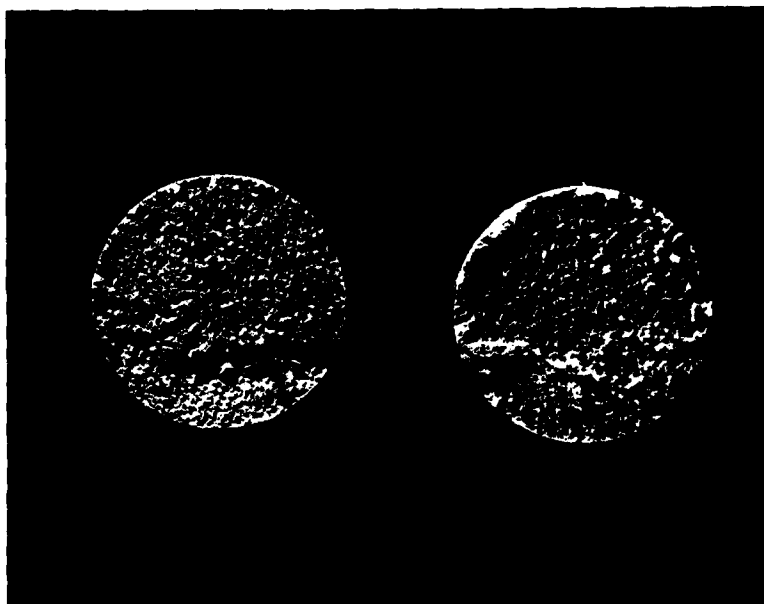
Typical Stress Rupture Fracture Surfaces
